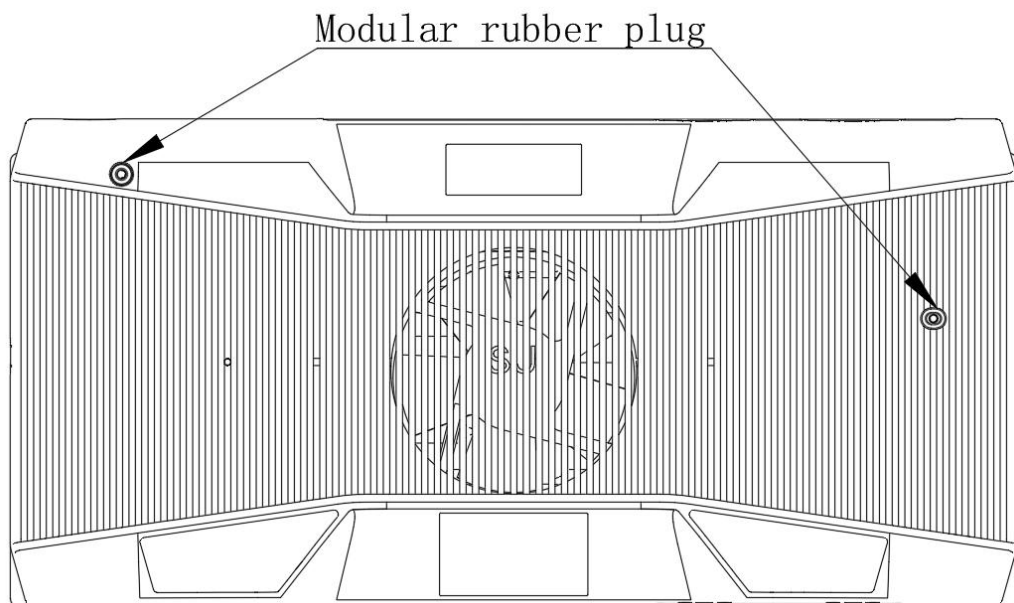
Schematic diagram of module rubber plug sealing screw holes
